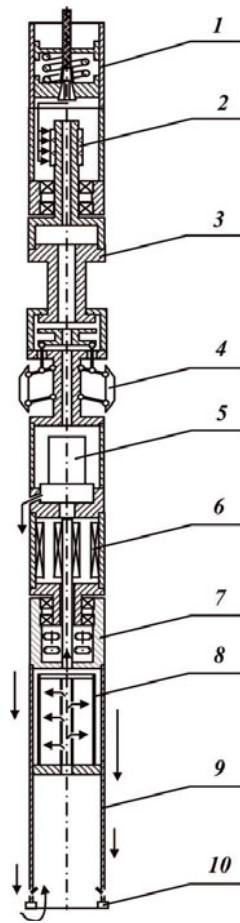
Electromechanical drill KEMS-132: 1. cable termination; 2. electric chamber; 3. hammer block; 4. anti-torque system; 5. pump; 6. electric drive motor; 7. reducer; 8. chip chamber including chip filter; 9. core barrel; 10. drill head. [21]
